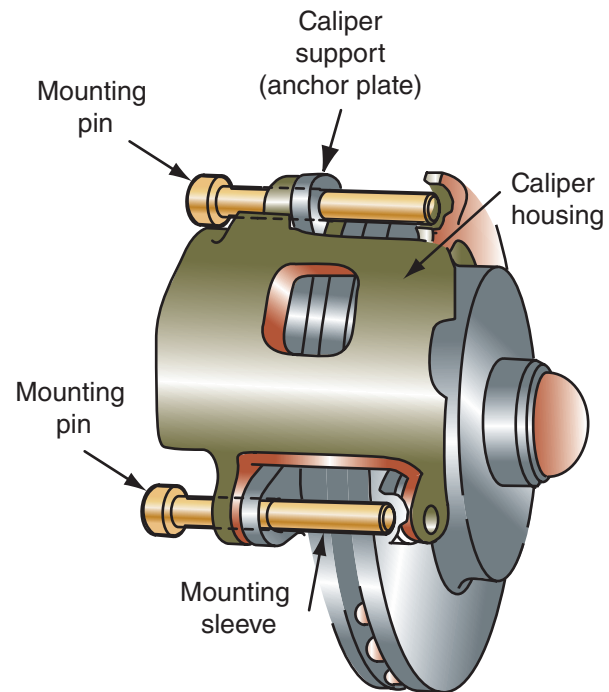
To remove a floating caliper, remove the pins holding it to the steering knuckle or bracket.
